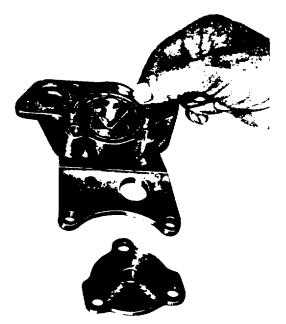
Checking Clearance between Inner and Outer Rotor.
